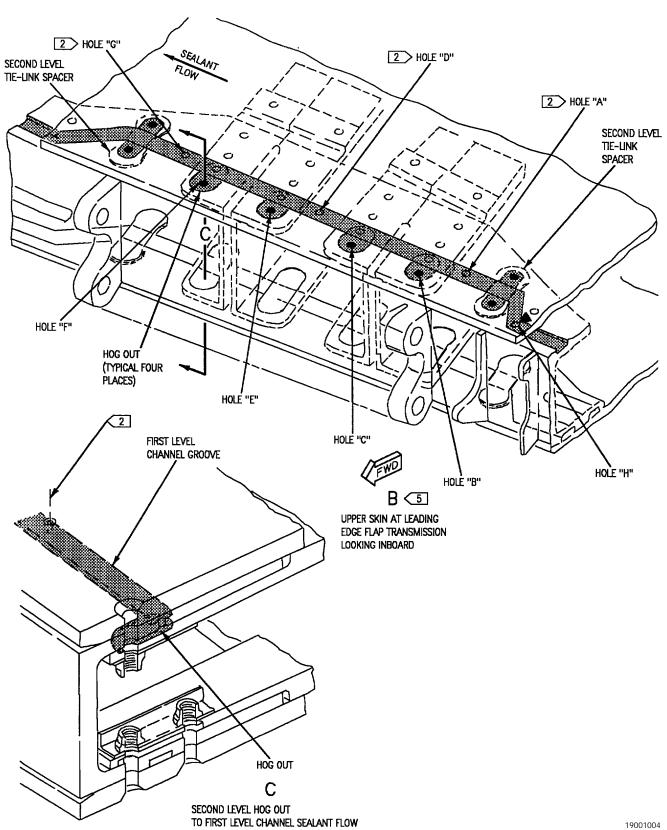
Upper Skin Channel Groove Seal Injection (Sheet 4)
